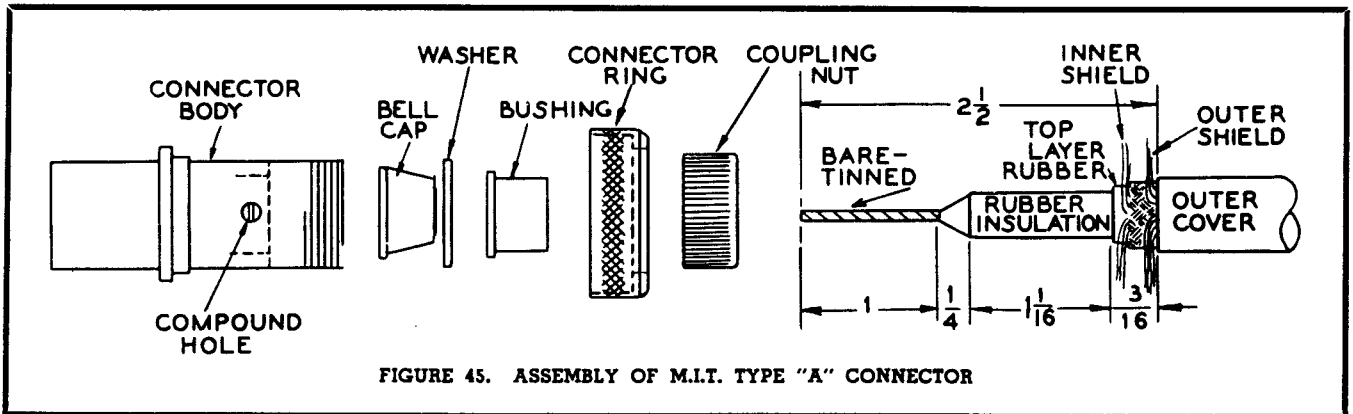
ASSEMBLY OF M.I.T. TYPE "A" CONNECTOR
